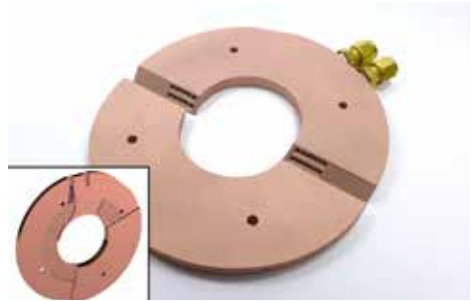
Specimen holder from copper alloy CuCr1Zr manufactured at Fraunhofer IPK (cutaway model) and CAD model showing bifilar executed heating channel design. (© Fraunhofer IPK)
